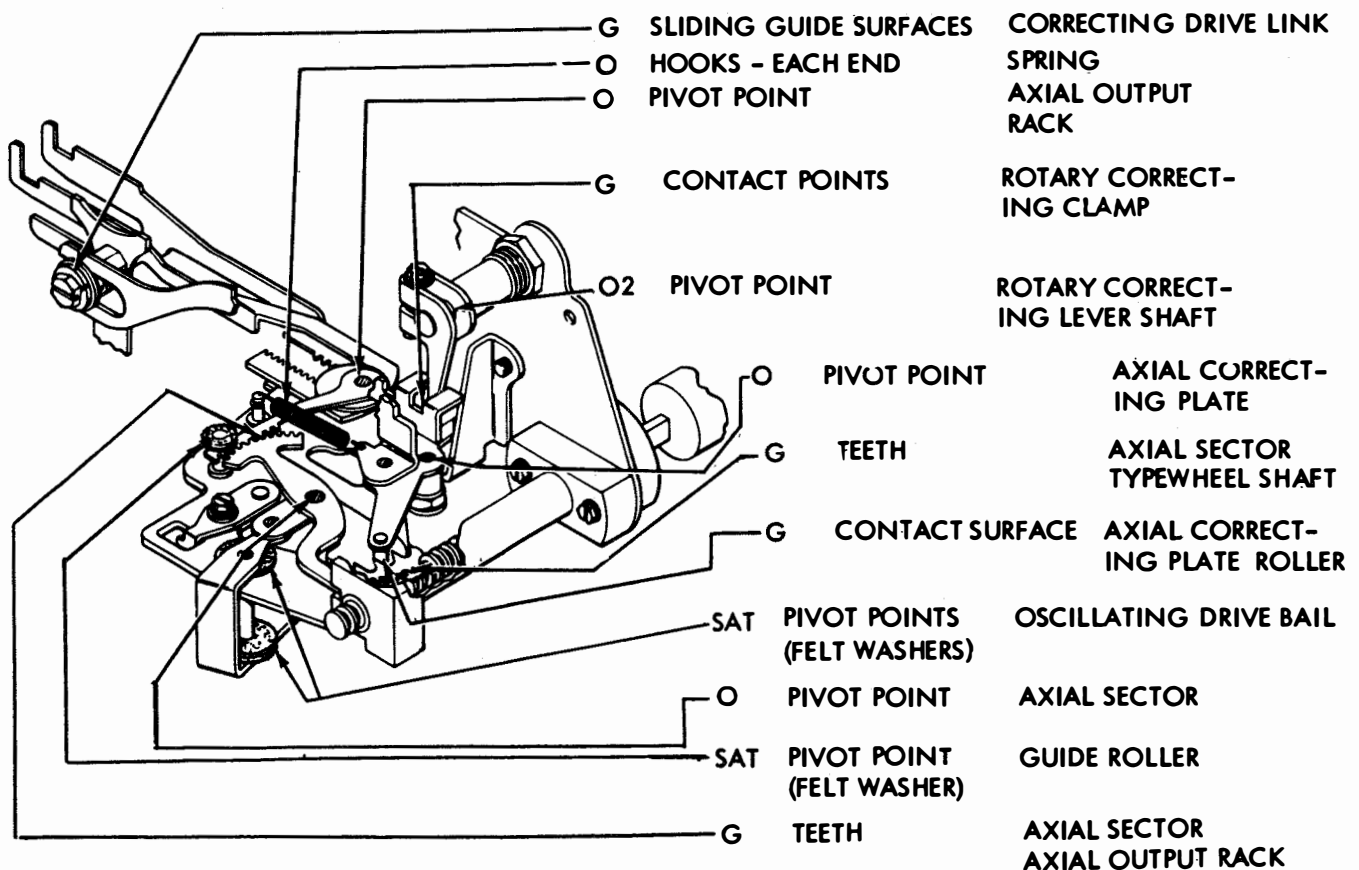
Axial Positioning Mechanism (Typing Perforator Only), Rear View
